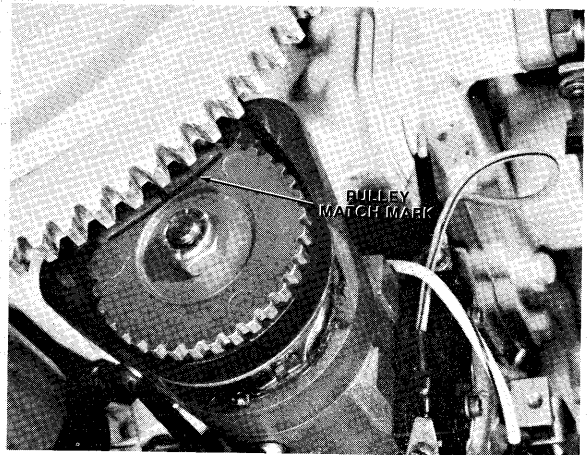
Aligning Distributor Pulley Match Mark With Flywheel
